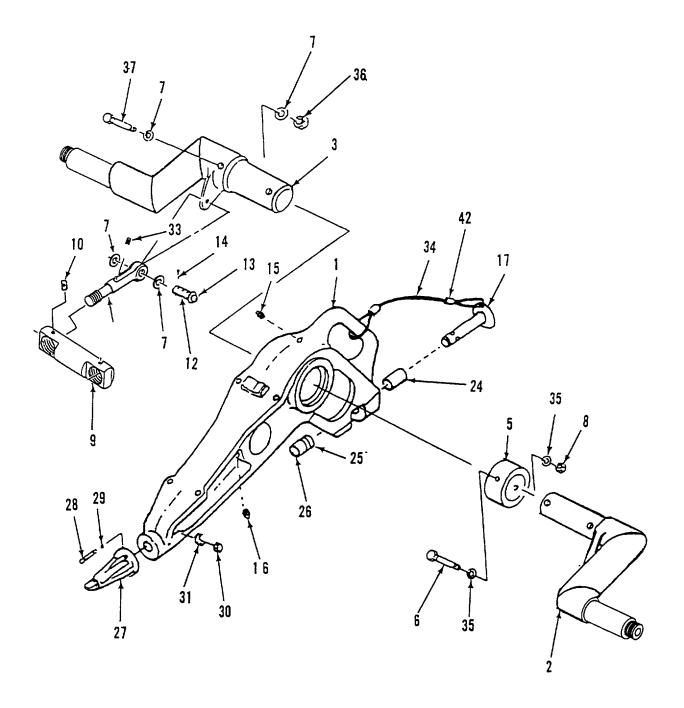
Cradle Assembly Repair, Model 214-706-104-101 (AVIM).
